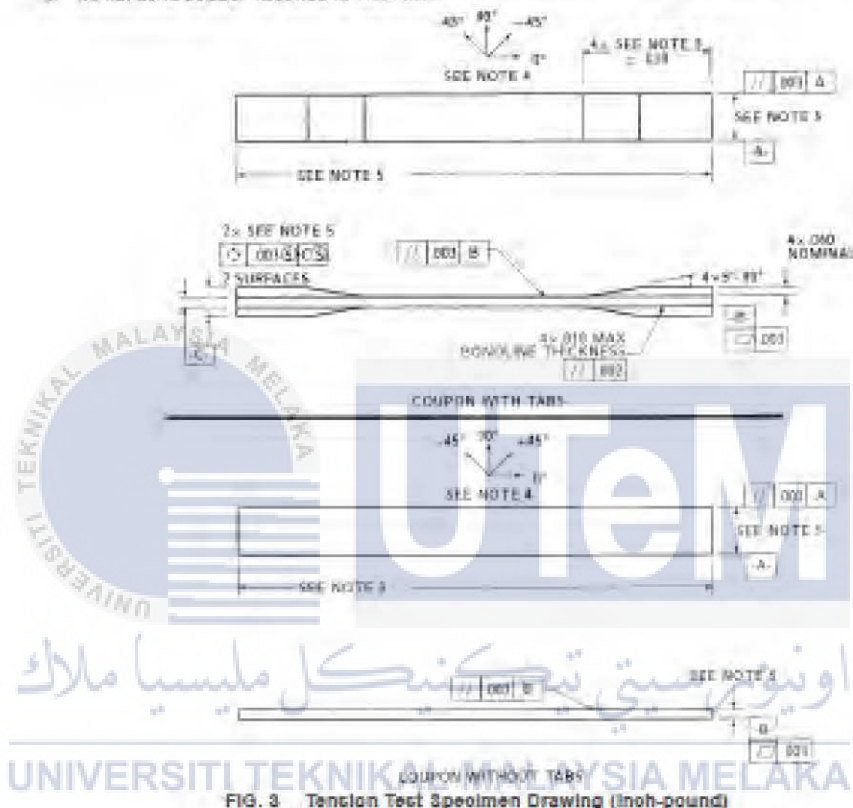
Tension Test Specimen Drawing (Inch-Pound)
